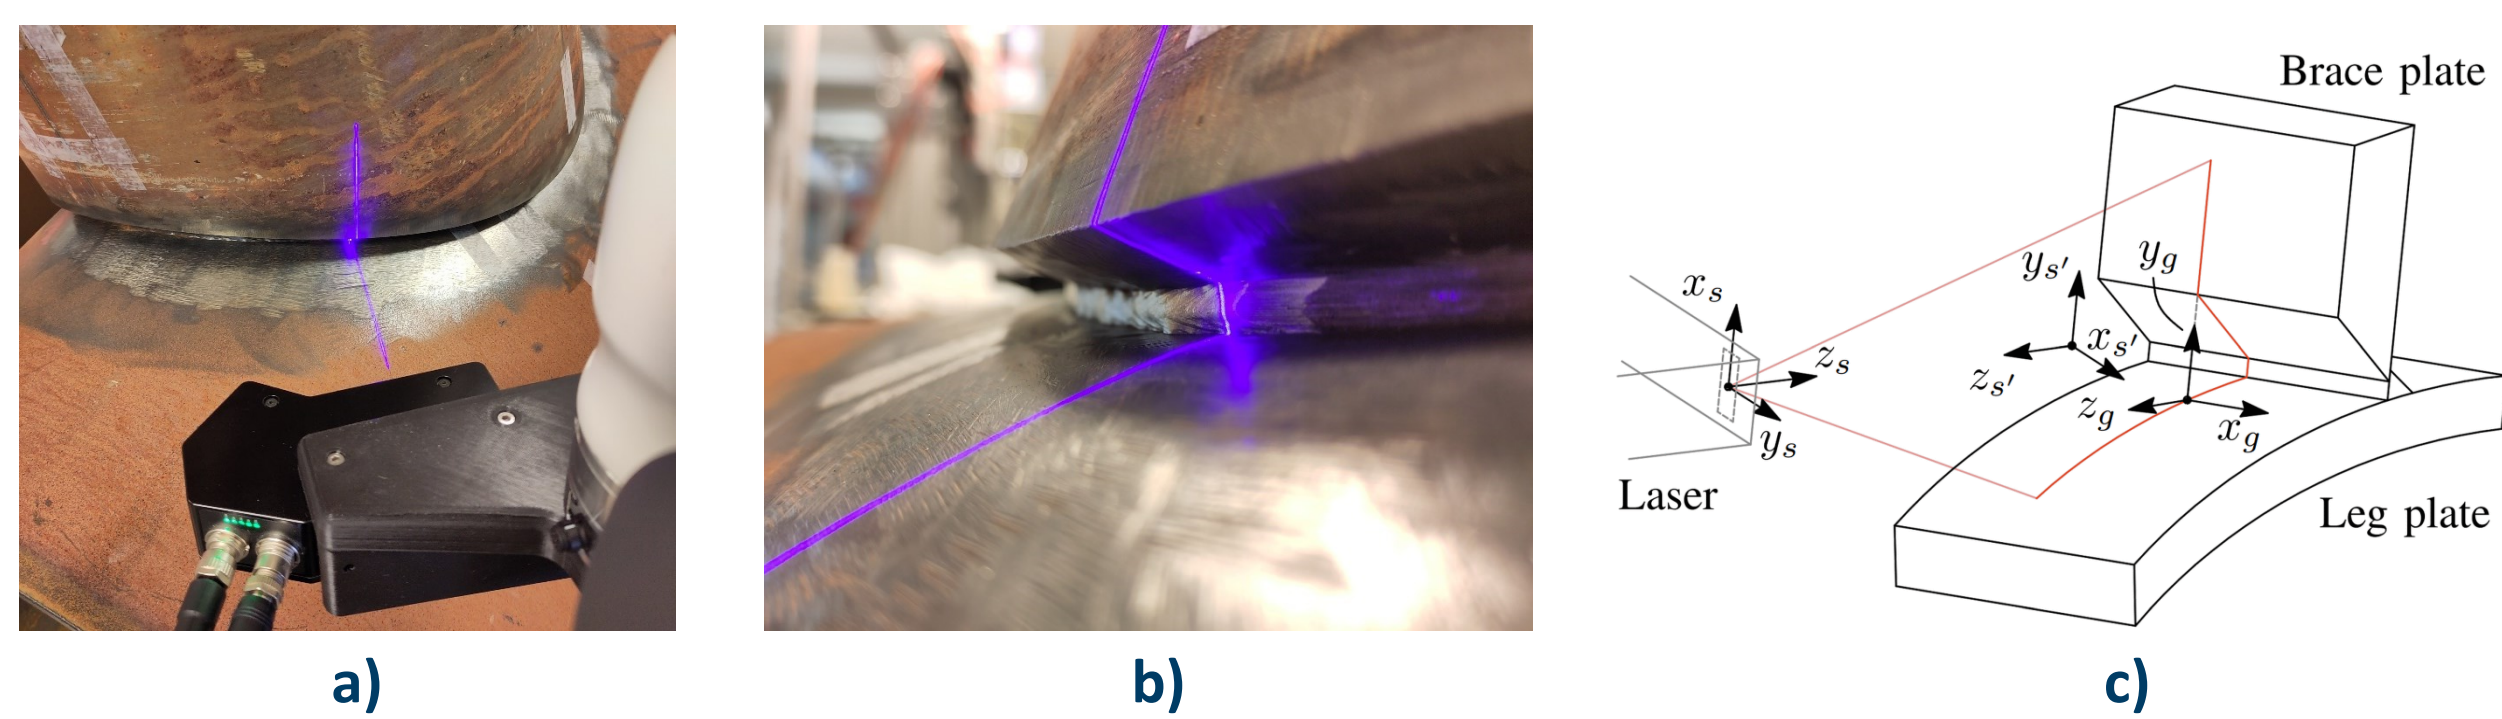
a) Experimental setup. b) Laser line beam on a T-joint weld groove. c) Sensor alignment and orientation with respect to the weld groove^[1]
